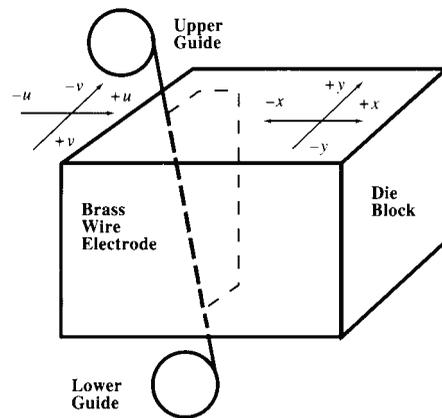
Wire Type EDM Machines Are Used to Cut Stamping Die Profiles.
